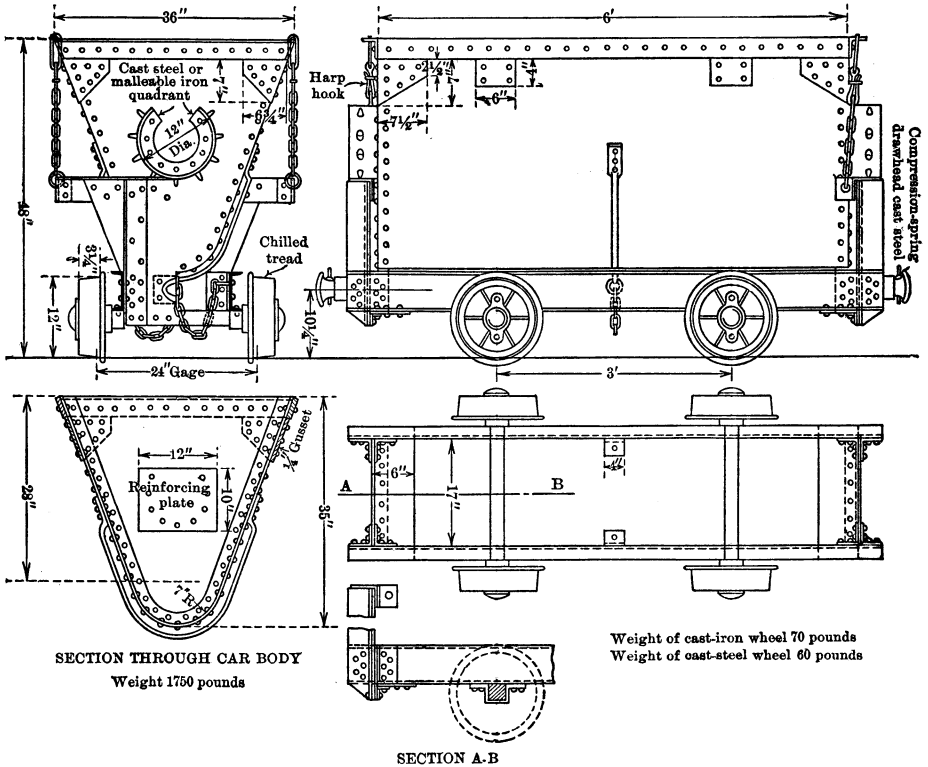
Rocker-dump tunnel car used on Los Angeles Aqueduct.
